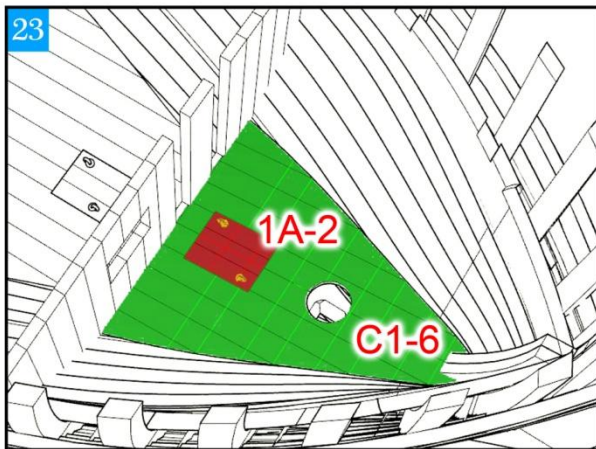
Template C1-6 is used to check the dimensions of the space and is trimmed until it fits perfectly. 1.5x5 maple wood to make the floor and the template used to guide the trimming of the planks.
